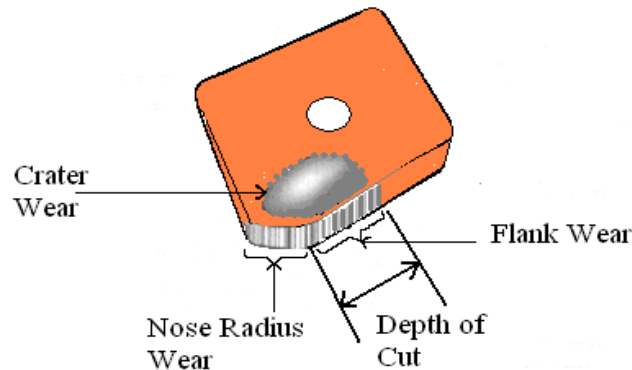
Types of Wear on a Single Point Cutting Tool
